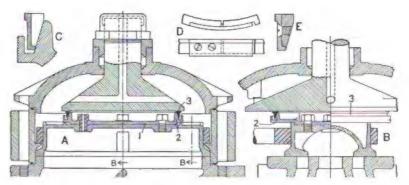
Locomotive Valve with "American" Balance-rig; special design by the Pennsylvania Railroad. Scale 1 to 12.
